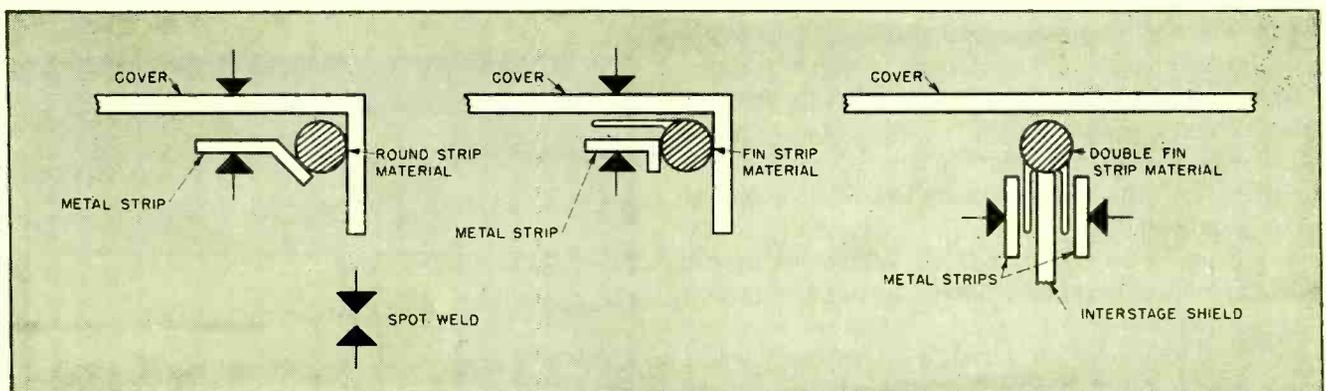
Three ways to design electrostatic shielding. When shields are spot welded metal gaskets are compressed forming a tight radiation seal
